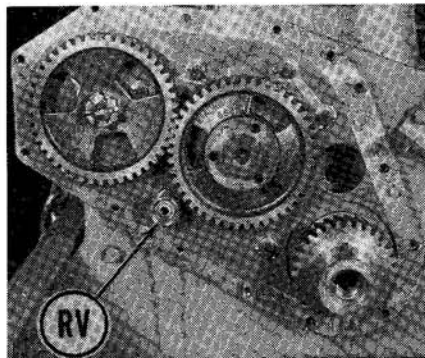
Camshaft front (outer) gear removed to show oil pressure relief valve (RV) location on model "FMD" prior to serial No. 1425097.
